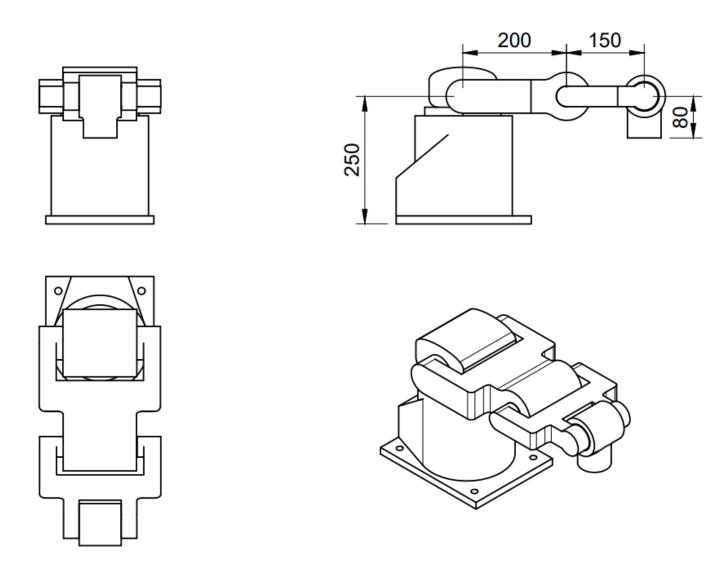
Standard views of the robot with dimensions and the isometric view Frame assignment
